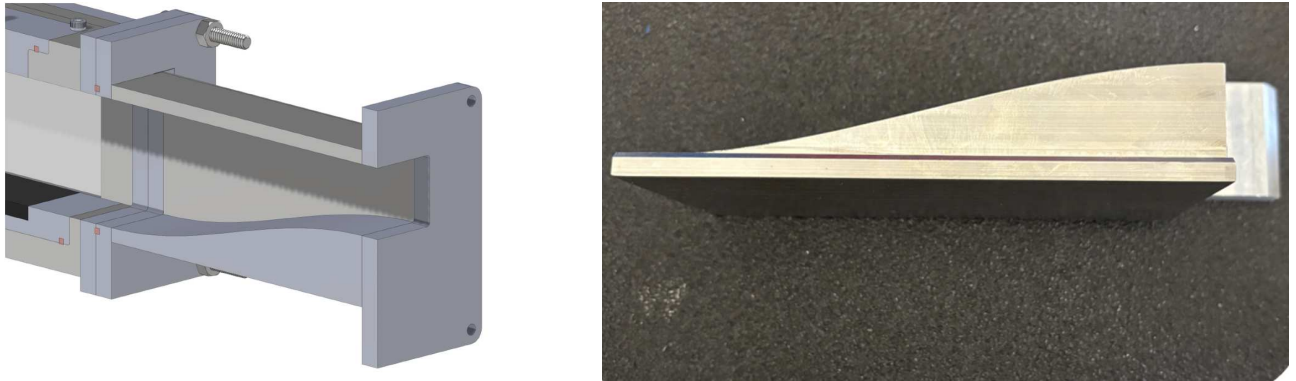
Test section cross section with component labels (left) and manufactured test section, before addition of laser ignition system and pressure transducer ports (right)
